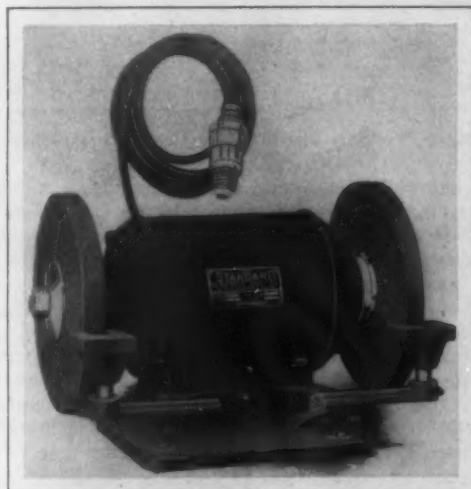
A Combination Bench and Tool Post Grinding Machine Built by the Standard Electric Tool Company, Cincinnati, Ohio
